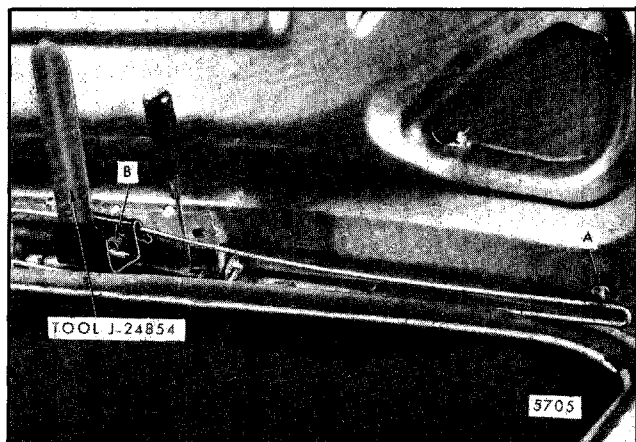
Rear Compartment Lid Removal - "11" Styles
